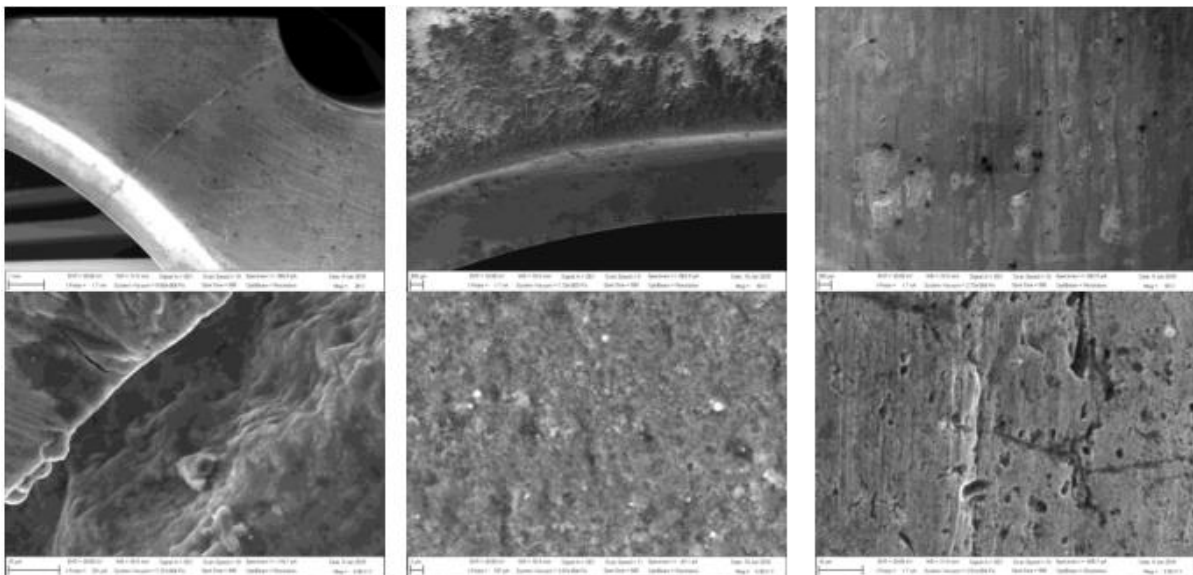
Degradation of molds during the injection of Al alloys - cracks, adhesion of the separating agent, tearing of material on the surface of the molds
